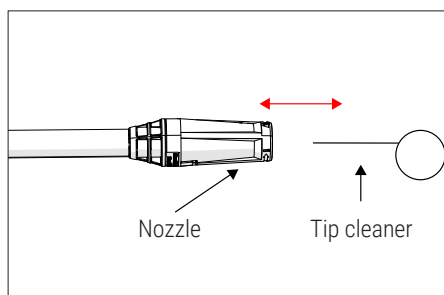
Insert tip cleaner in nozzle hole and move back and forth until debris is dislodged
